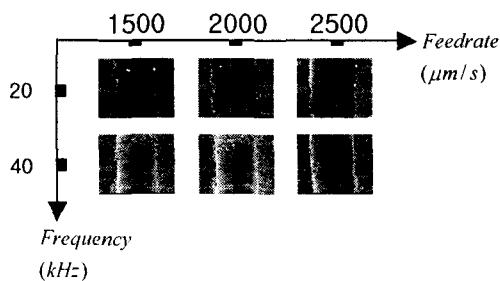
The photograph of the internal surfaces of micro holes (SEM)
